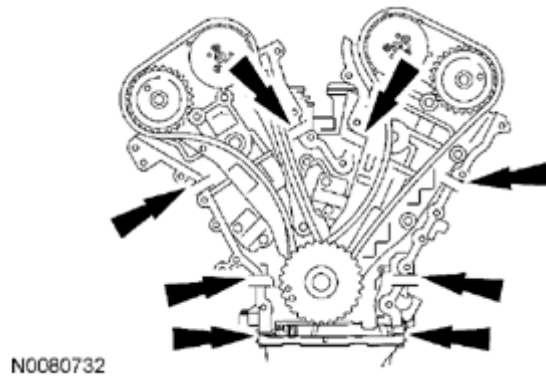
Locating Sealant At Cylinder Block, Lower Cylinder Block, Cylinder Head And Oil Pan Mating Surfaces
